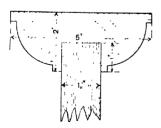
Section of Top Frame and Side-piece of Portable Desk.
